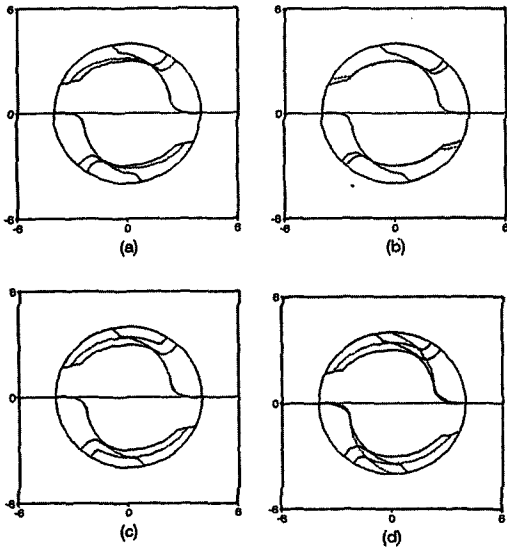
Comparison of Helical Flute Grinding in Manufacturing End Mills with 2 Edges
